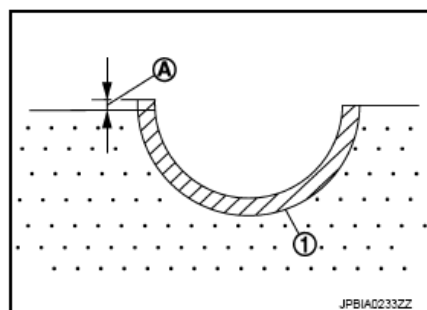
Identifying Connecting Rod Bearing Crush Height
